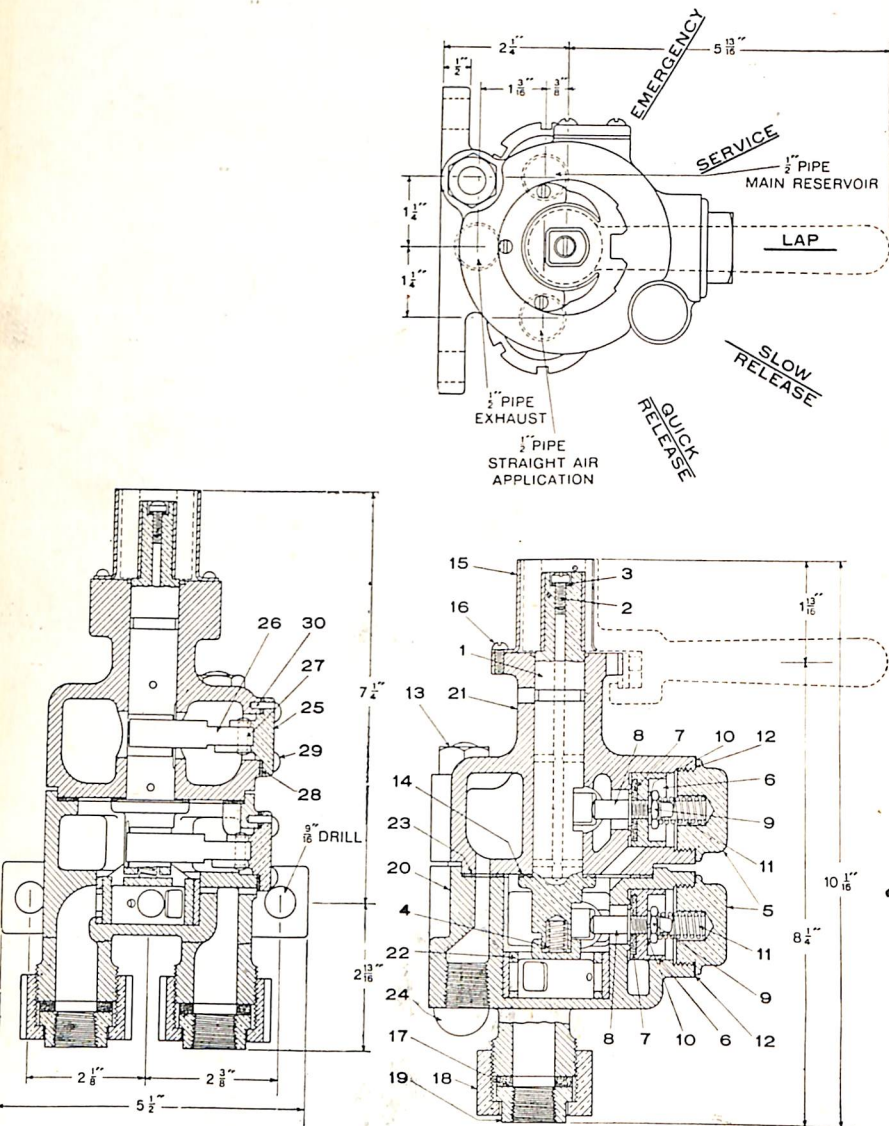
PV-3 Brake Valve, Plan View and Vertical Sections
